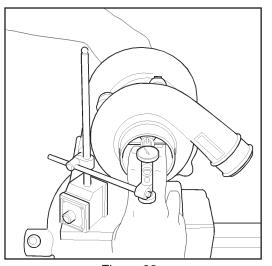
Measuring compressor wheel radial clearance with deflection gauge 8222 and measuring stand 8209
